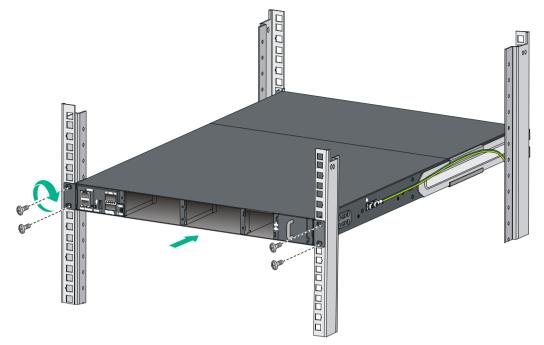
Mounting the HPE 5940 2-slot switch in the rack (network port-side mounting position for the mounting brackets)
